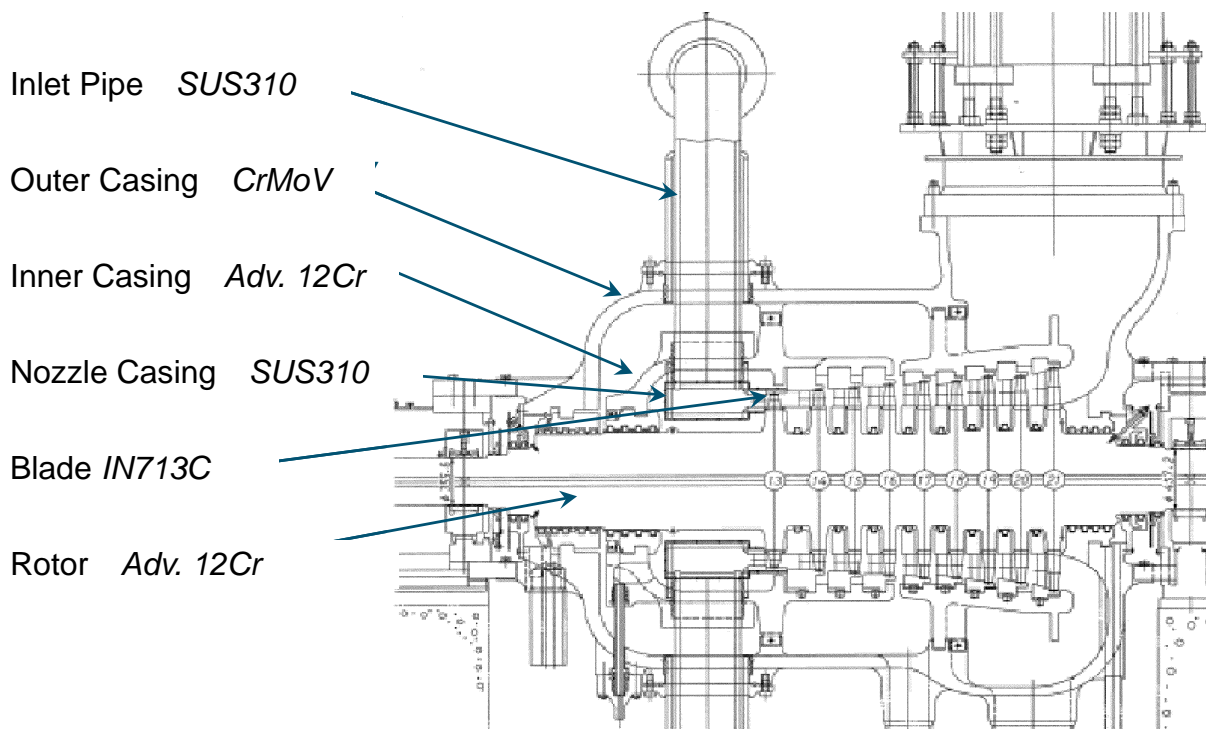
Cooled Steam Turbine⁽⁹⁾
